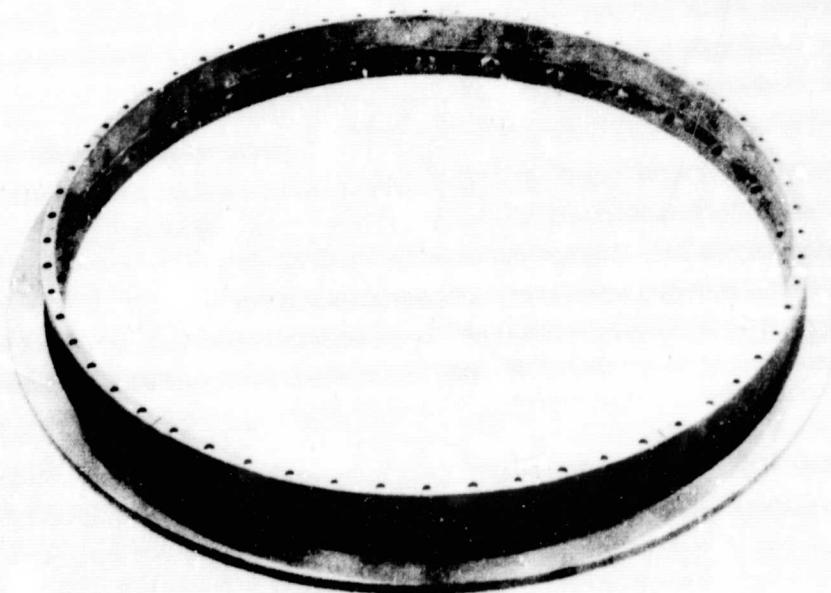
Test Rig Interdisk Spacer (XP-82834)
